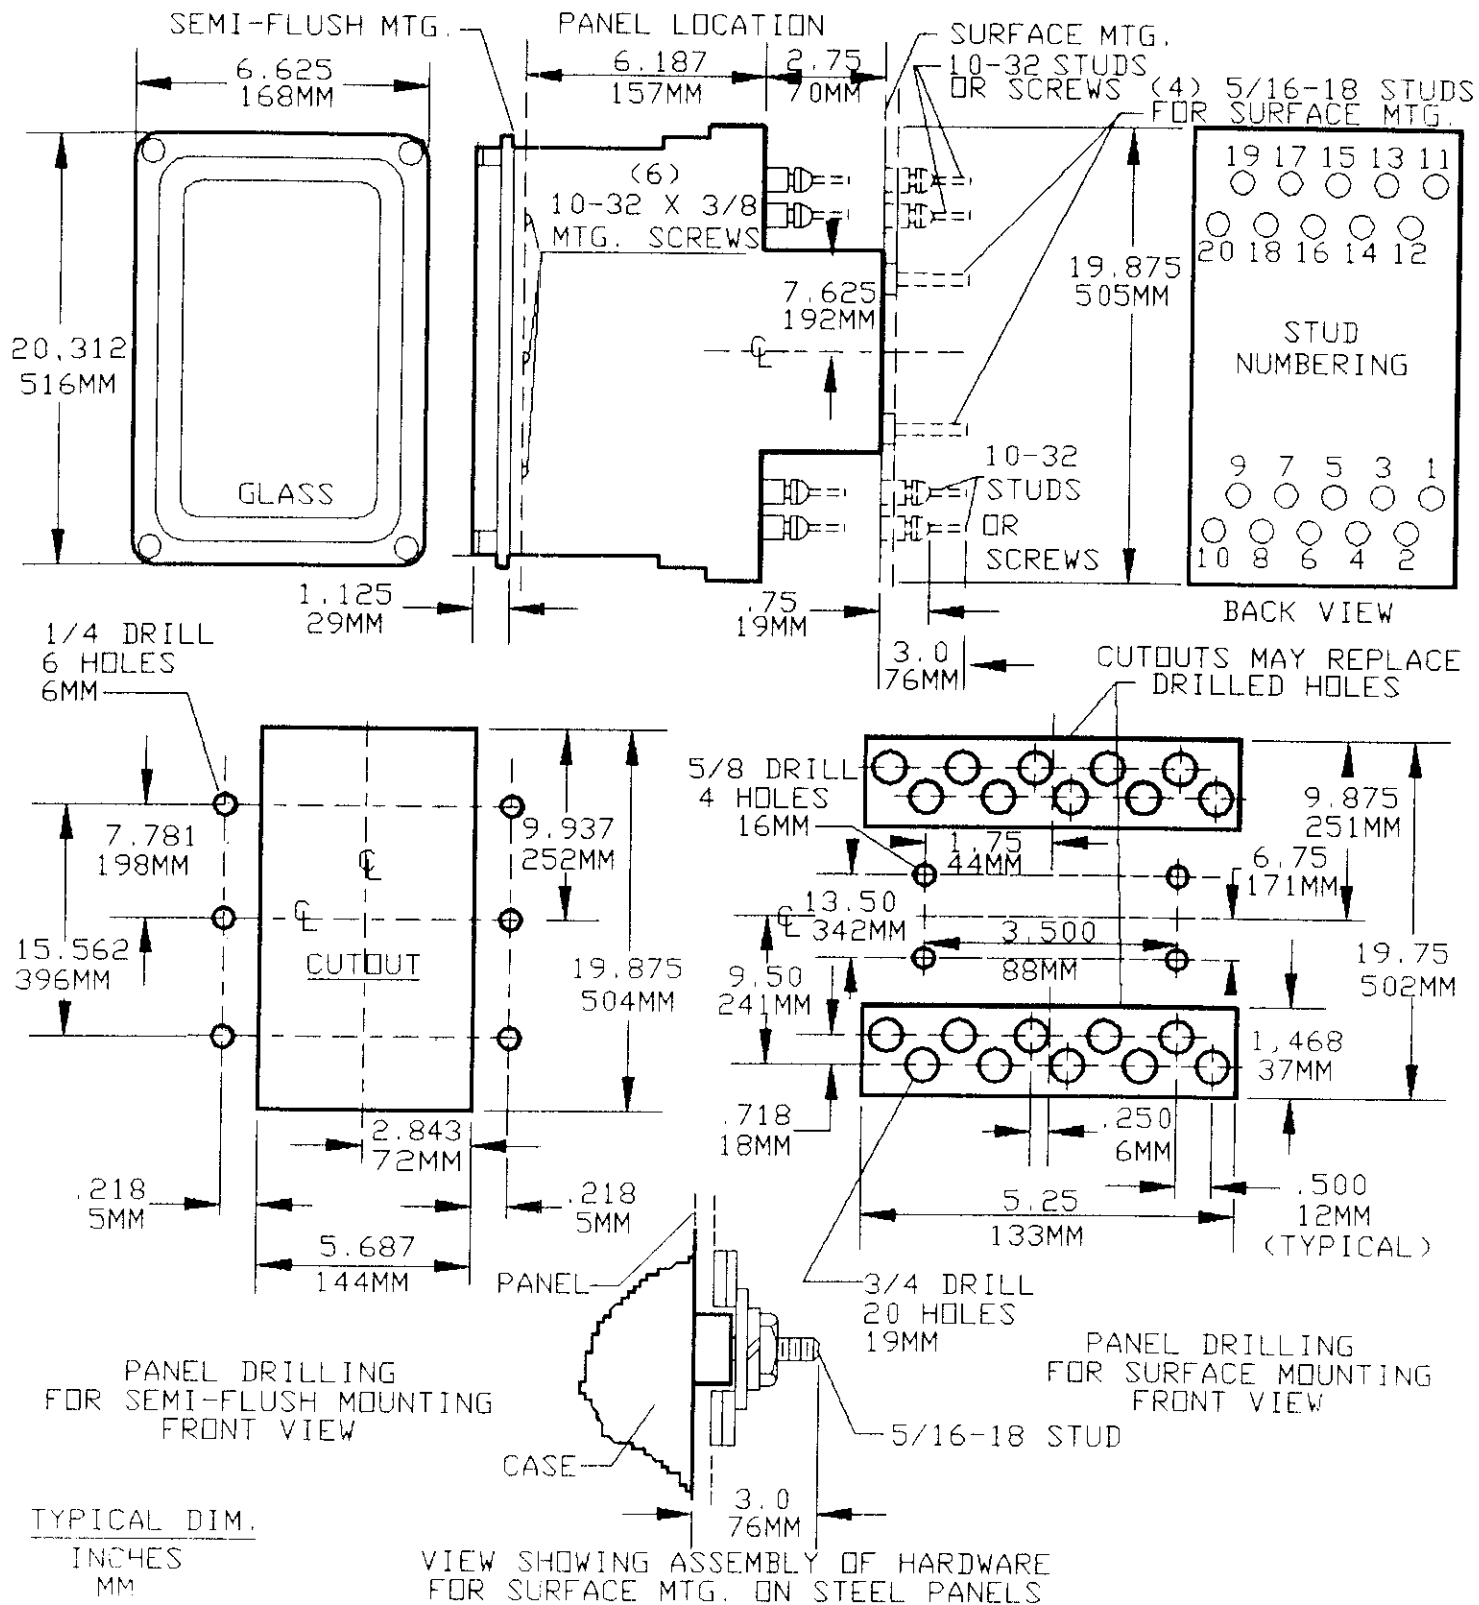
(0178A7336 [6]) Outline and Panel-Drilling Dimensions for Relay Type CEY51A
